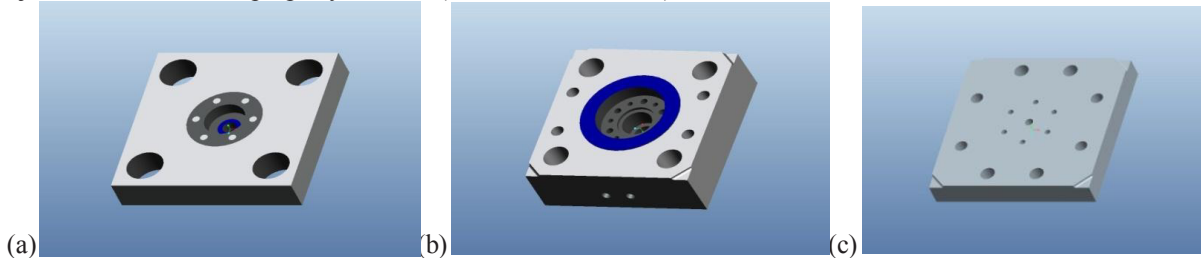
Model of (a)Cavity plate (b) Core plate (c) Core retainer plate
